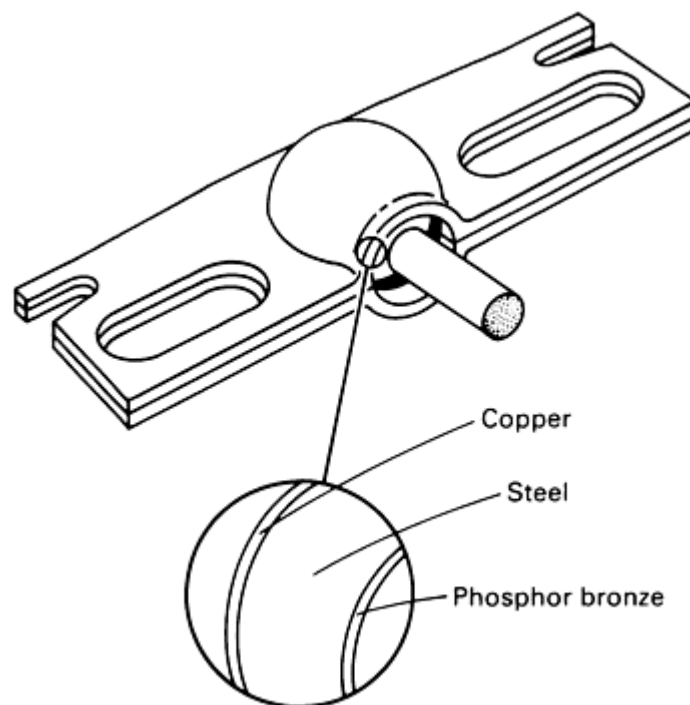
Clad metal windshield wiper socket, which consists of copper-clad, steel-clad phosphor bronze
